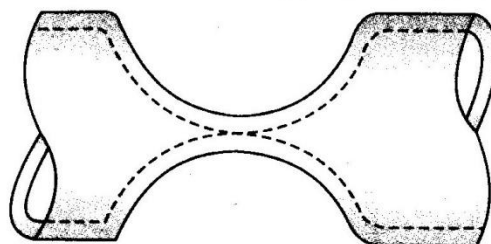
A sketch showing swaging tool, swaging the open end of a tube.
